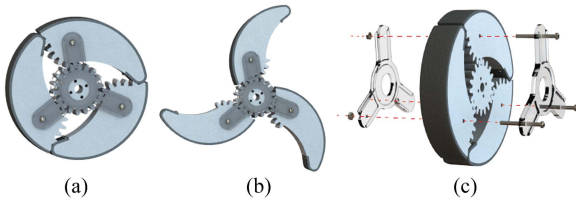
WheelLeR mechanism overview: CAD assembly design of (a) closed wheel, (b) open wheel, and (c) an exploded view [9].
